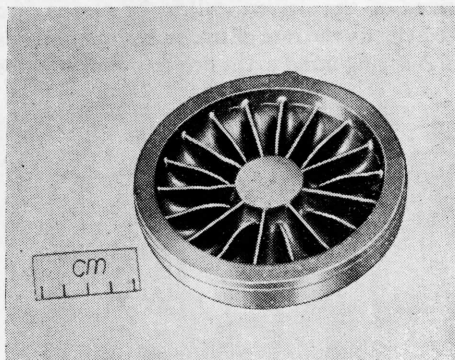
Casting of one half of the hydraulic coupling for fan drive
